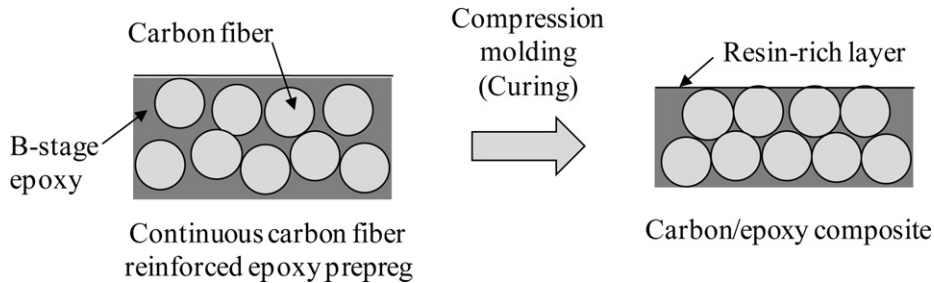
Schematic drawings of the surface conditions of the composite plate without treatment.
